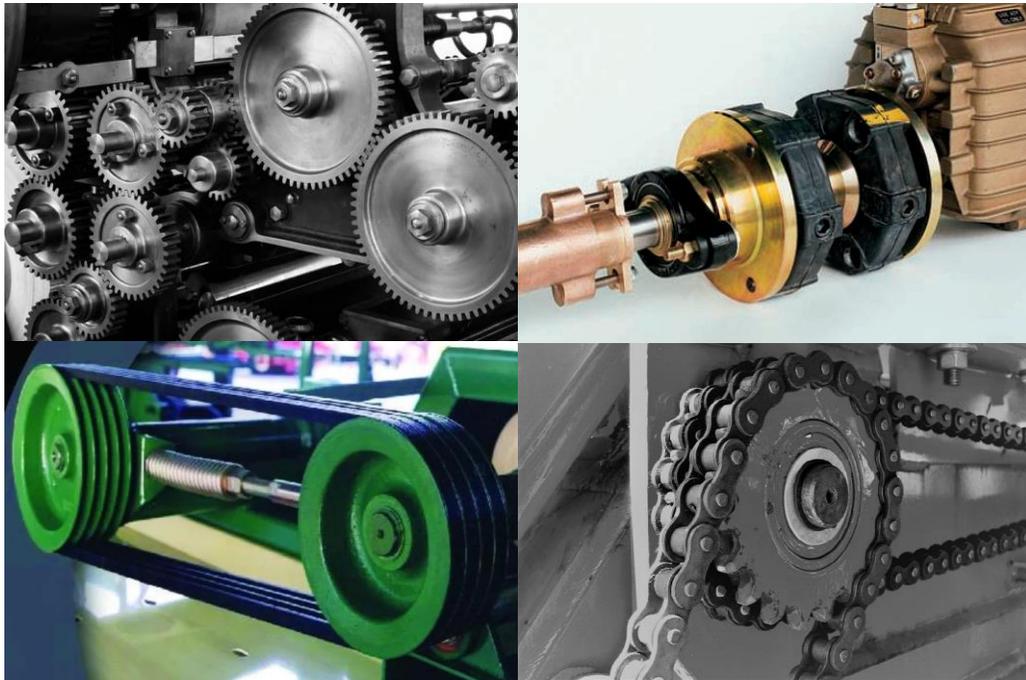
(a) Gears [39], (b) Direct coupling [40], (c) Belt drive [41] & (d) Chain drive [42]
